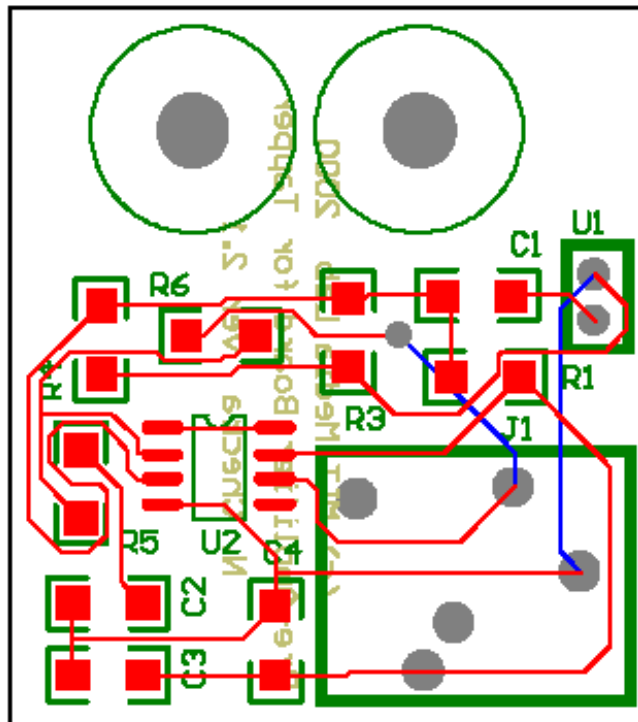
PCB Layout of the pre-amplifier board (top and bottom layers).
